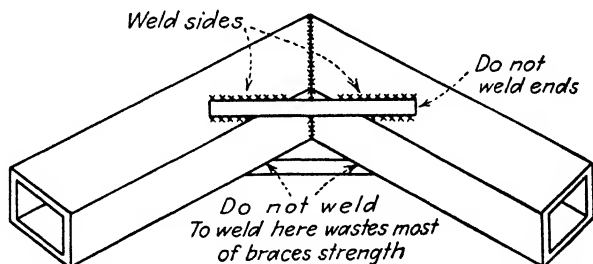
When braces span parts of a curved or angular member, the inner "reinforcement-to-member" surface should never be welded. Such welds weaken the reinforcement as well as make the welds on the sides useless.
